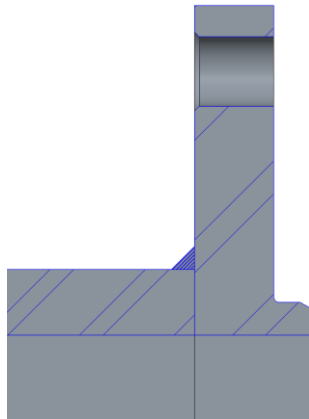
Welding of the flanges on straight 150x150 pipe and contractor/diffuser
